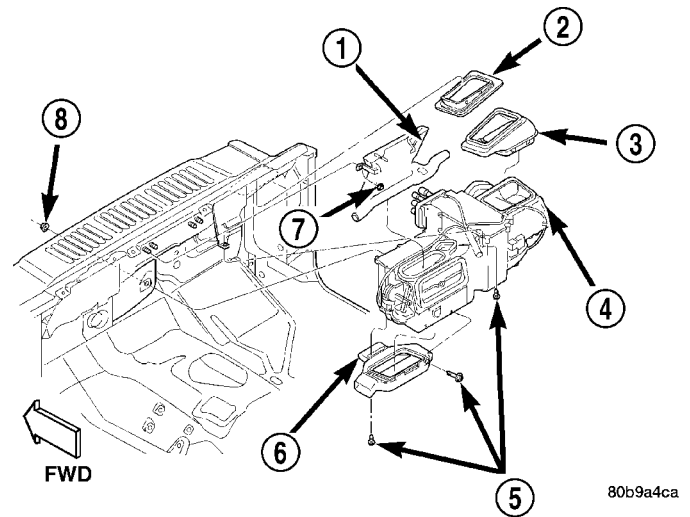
Floor Distribution Duct - LHD Shown, RHD Typical
